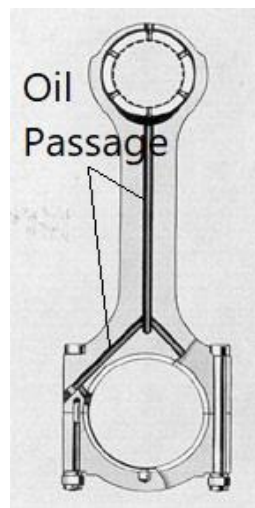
Oil passages inside the connecting rods for piston pin lubrication [14]
